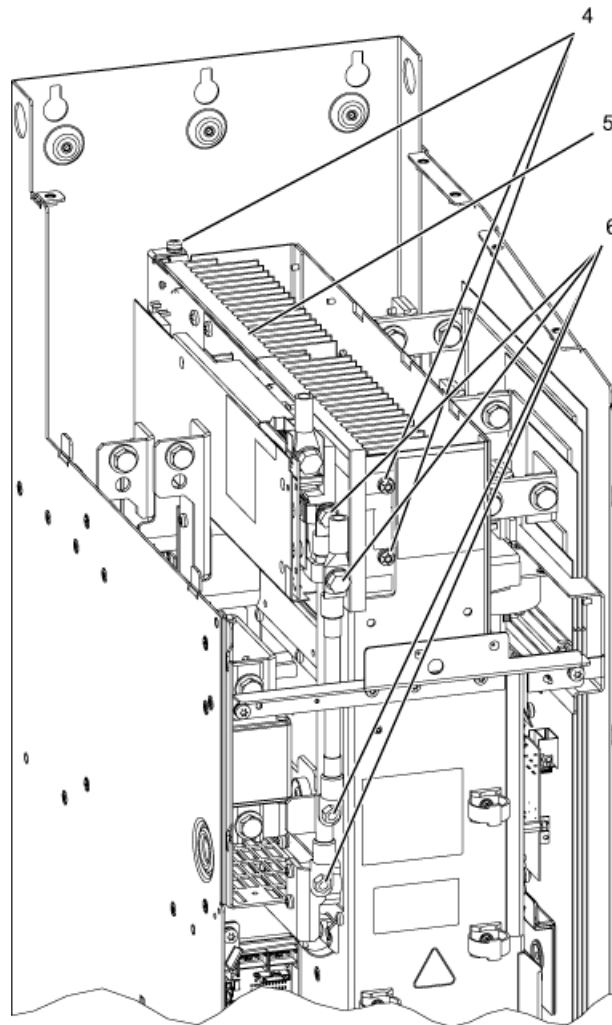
Installing the Braking Module in a Smart Line Module / Active Line Module / Motor Module, frame size GX – steps 4 - 6
